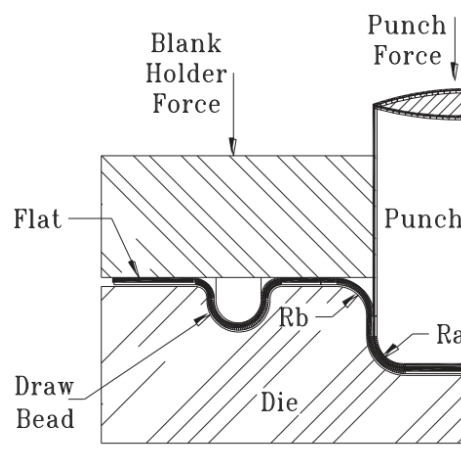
Bending under tension in a typical stamping (drawing) operation [8]
